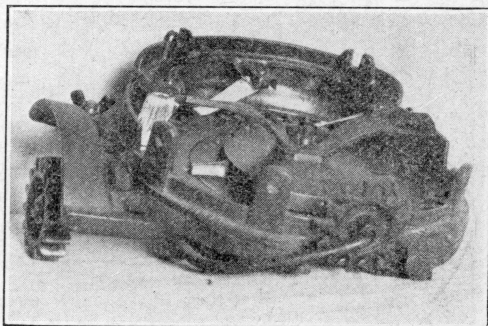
Cell-drop planting mechanism with plate mounted eccentrically with the hopper. (Note the spur wheel knockout.)
